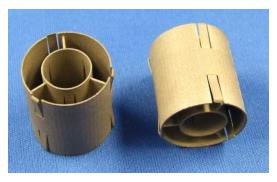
Fixture for sealed mounting of accelerometers to monitor transportation (directly after printing and after finishing)
